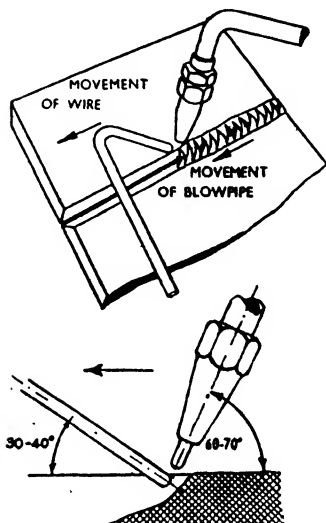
LEFTWARD METHOD OF WELDING
